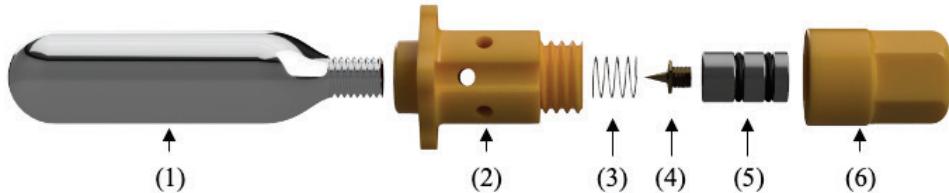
Designed parachute ejection mechanism in exploded view: (1) – CO₂ cartridge; (2) – housing; (3) – safety spring; (4) – firing pin; (5) – piston; (6) – electric igniter mounting
